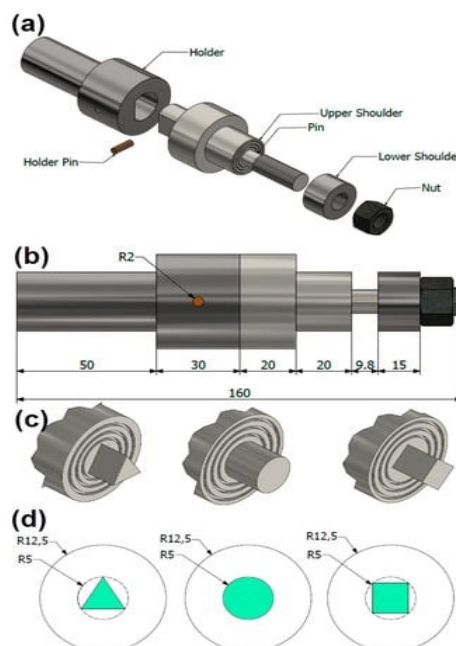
Dimension of BT assembly (all dimensions in mm). (a) Exploded assembly of BT parts, (b) Dimensions of BT, (c) 3D view of used BT pin profiles, and (d) dimension of BT pins and shoulders.
